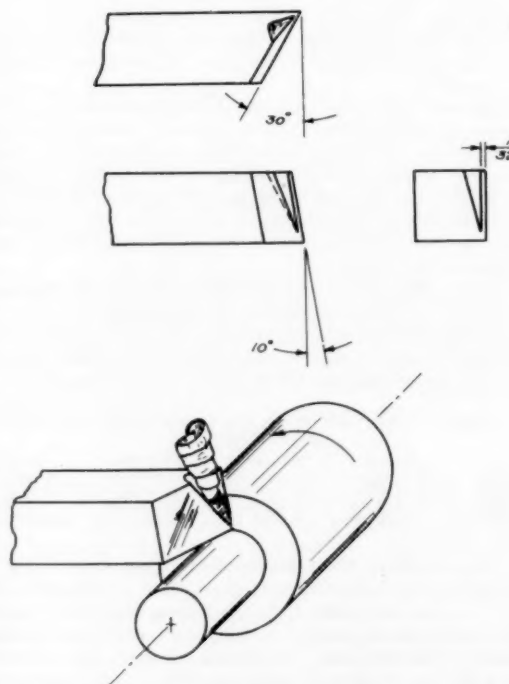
SCREW MACHINE TURNING TOOL 18-4-1 HSS
